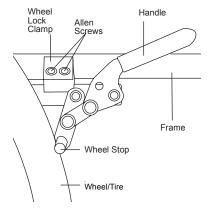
Adjusting/Replacing Standard Push to Lock Wheel Lock
